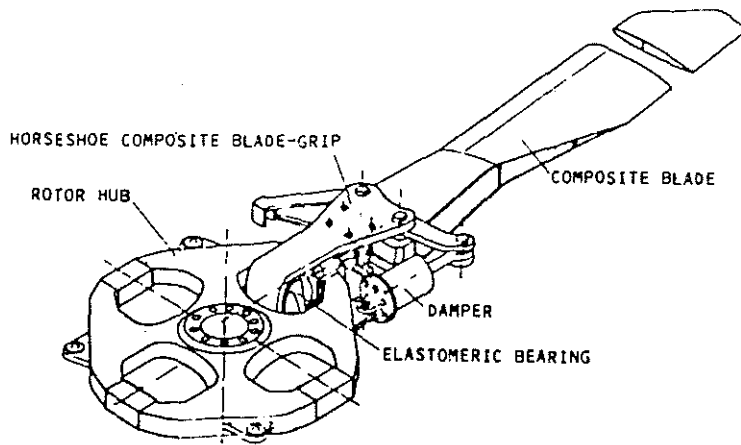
A109B MAIN ROTOR ASSEMBLY
